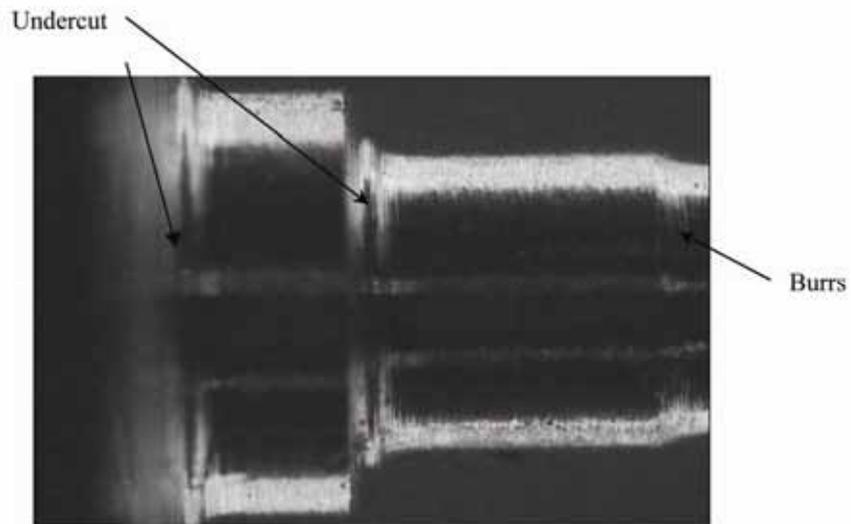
Defects in step cutting operation (scale of 1:0.0026)
